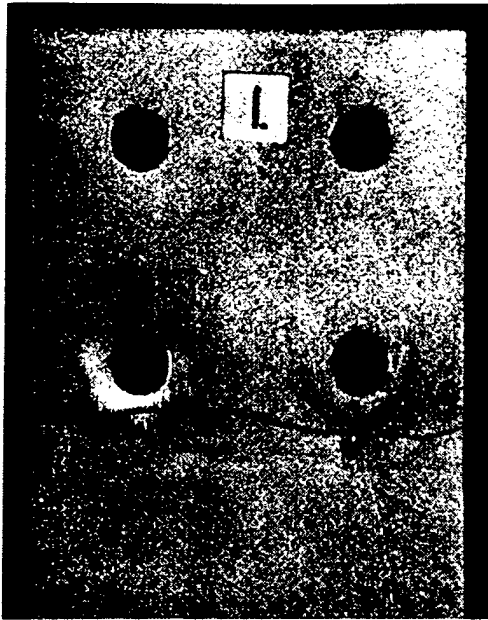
Fatigue failure of a lap splice attributed to fretting (ref. 3).
